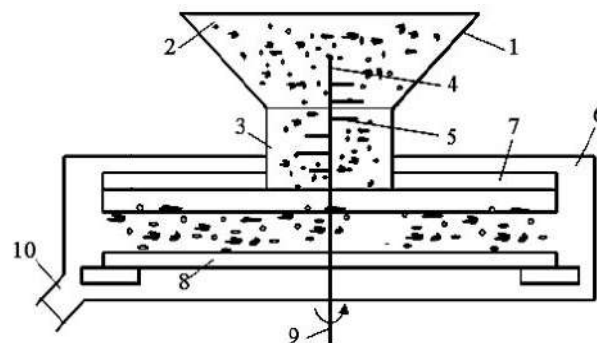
Scheme of the grating device: 1 – hopper; 2 – loading neck; 3 – loading hole; 4 – activator; 5 – bar; 6 – body; 7, 8 – fixed and moving disk; 9 – drive shaft; 10 – output channel
